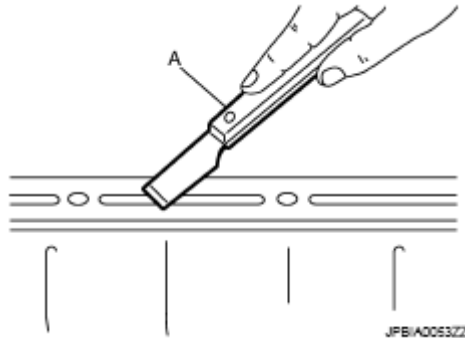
Using Scraper To Remove Old Liquid Gasket
